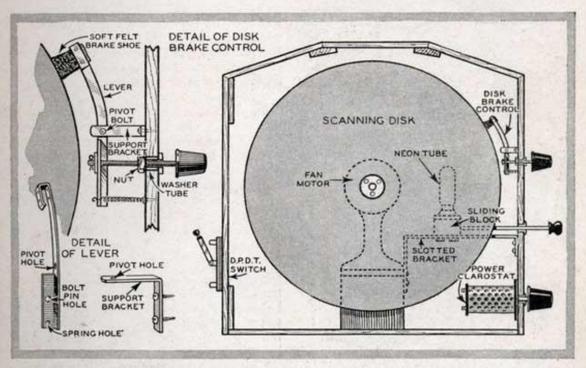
The above drawing shows arrangement of the parts in the cabinet, and details of the brake which regulates disk speed. The motor table is built so that the motor shaft lines up exactly opposite the center mark on the cabinet front. The D.P.D.T. switch throws receiver from speaker to neon tube.
